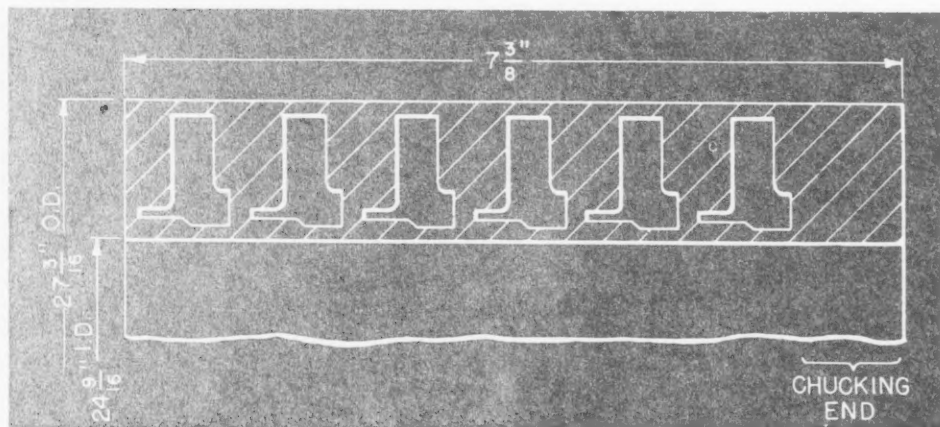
Six high-temperature alloy rings for aircraft jet engines can be machined from a single centrifugal casting, $7\frac{3}{8}$ inches wide
